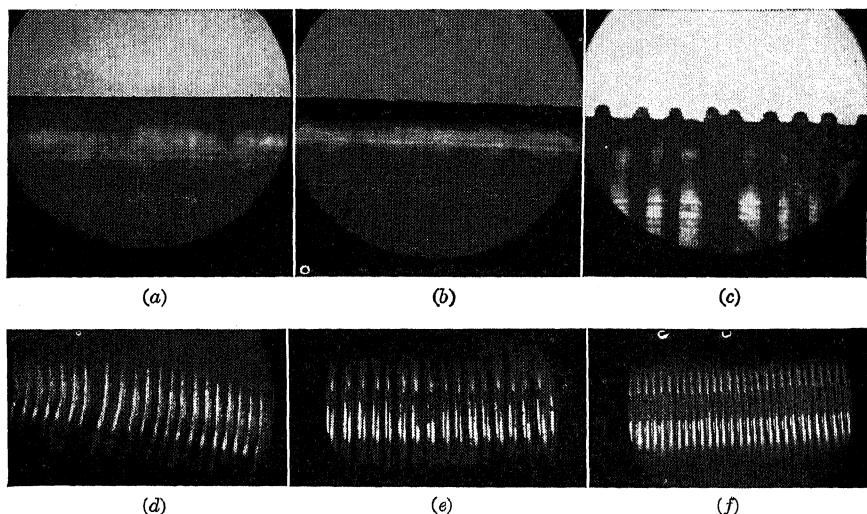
Mandrel and winding defects: (a) Card-type mandrel properly milled; (b) rough mandrel; (c) and (d) irregular windings due to rough mandrels; (e) widely spaced winding; (f) good winding on properly treated mandrel.
